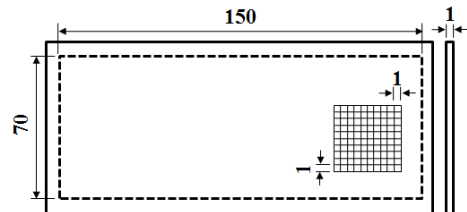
Dimensions of specimen for salt spray test (Unit : mm)
